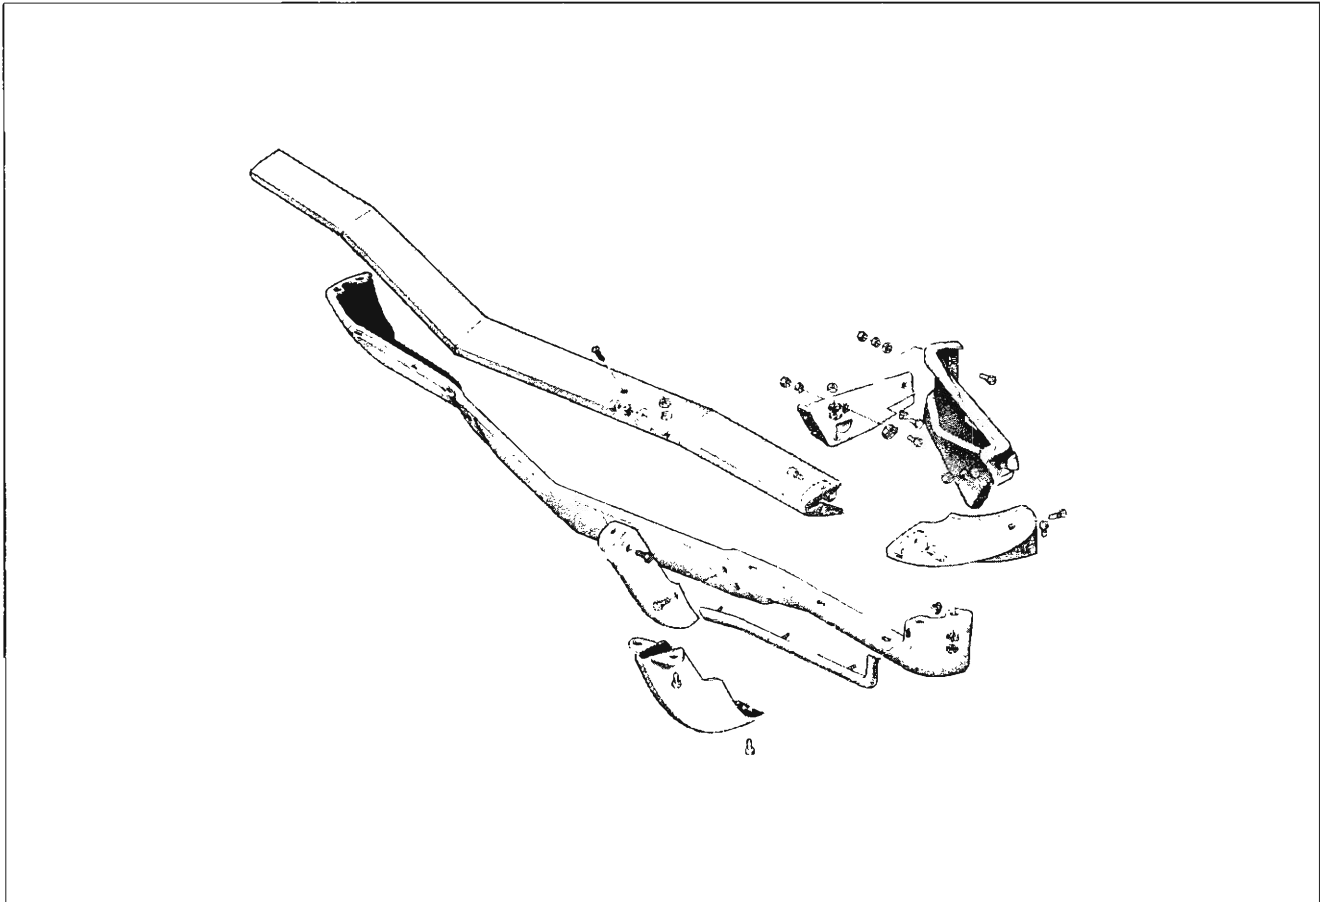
Front Bumper and Valance Assembly—Chevrolet
